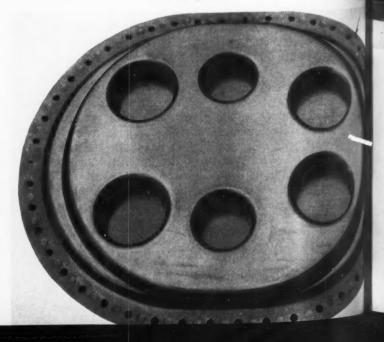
Below—Aircraft subassembly of aluminum alloy utilizes spot welding to join outside flat sheet to inner reinforcing formed sheet. Upper arrow indicates a spot weld, lower shows a mounting hole
